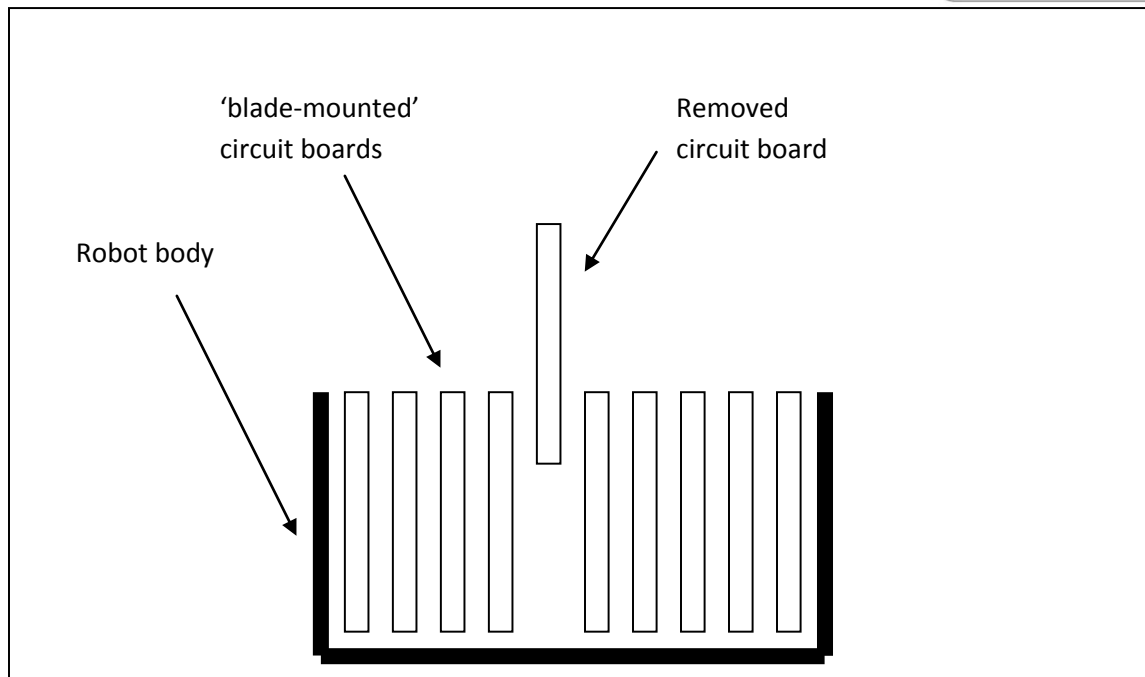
Blade-mounted server style mounting of all circuit boards (prelim. idea)
